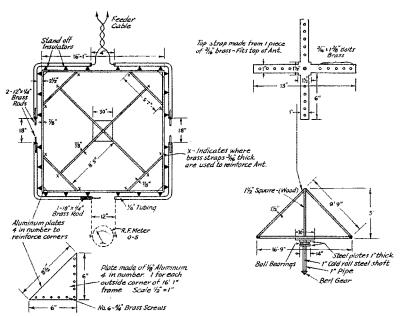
CONSTRUCTIONAL DETAILS OF THE ANTENNA ASSEMBLY AT W8CPC
